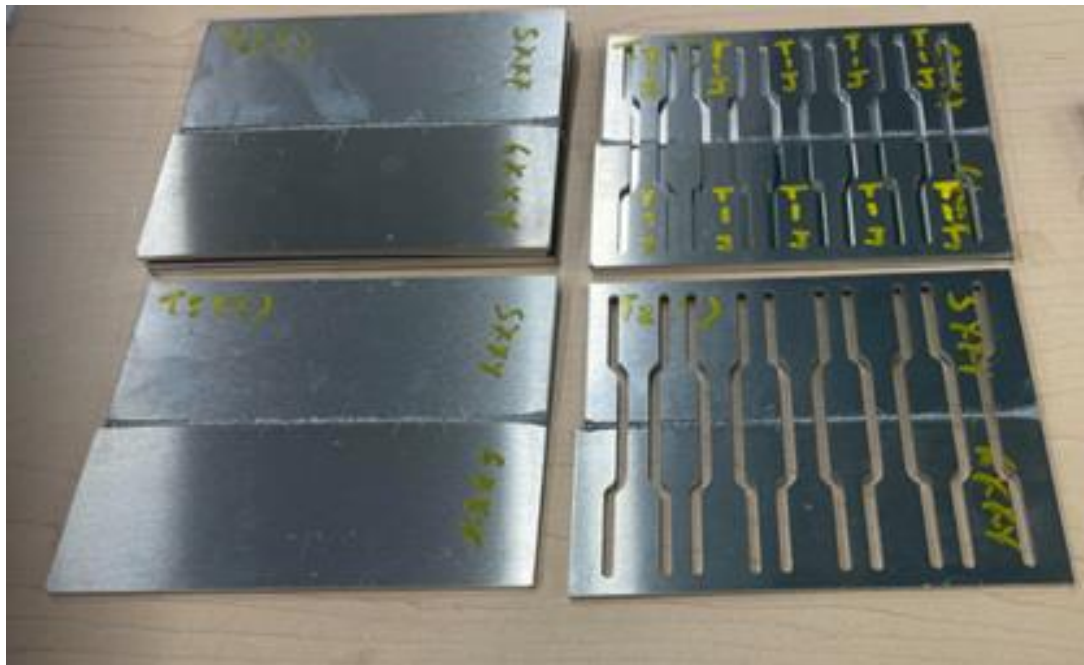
Left: Welded Plates. Right: Cutted samples
